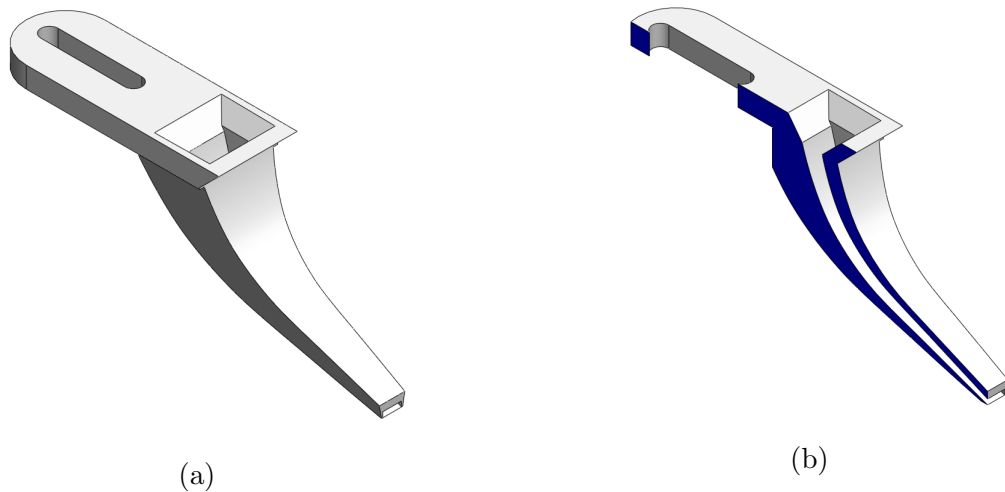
Additive manufacturing feed nozzle version two; (a)full view (b) section view.
